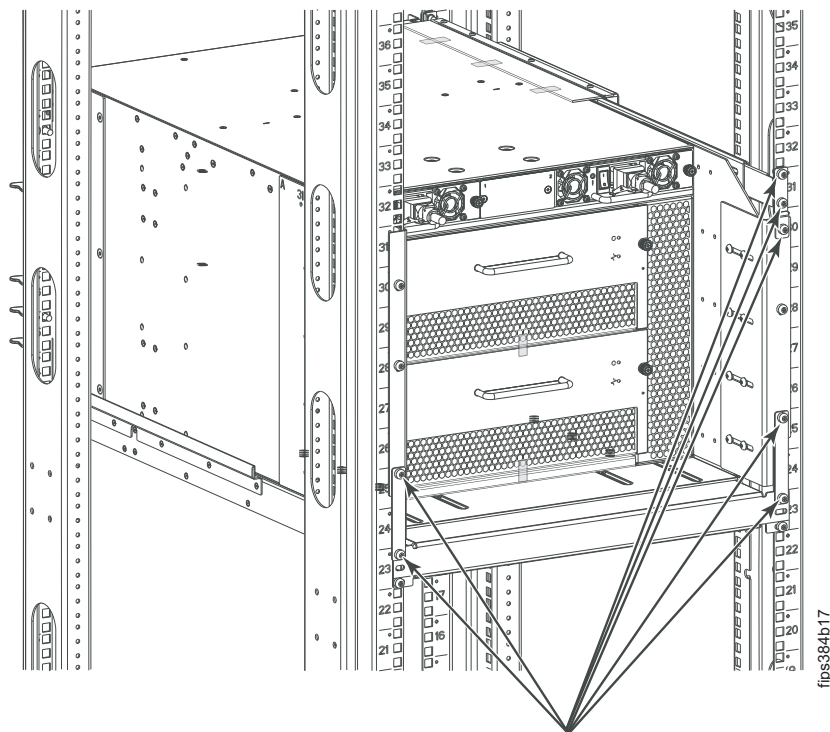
2499-192 rackmount screw removal (non-port side view)
